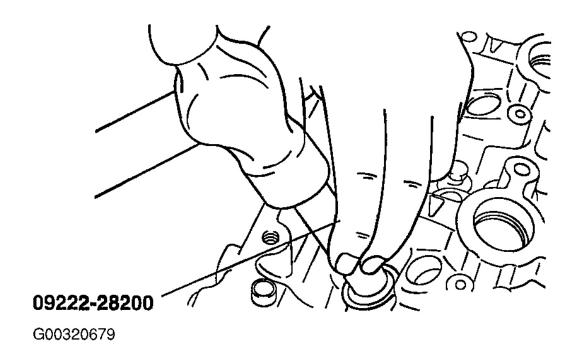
Installing Valve Stem Seal Courtesy of KIA MOTORS AMERICA, INC.
